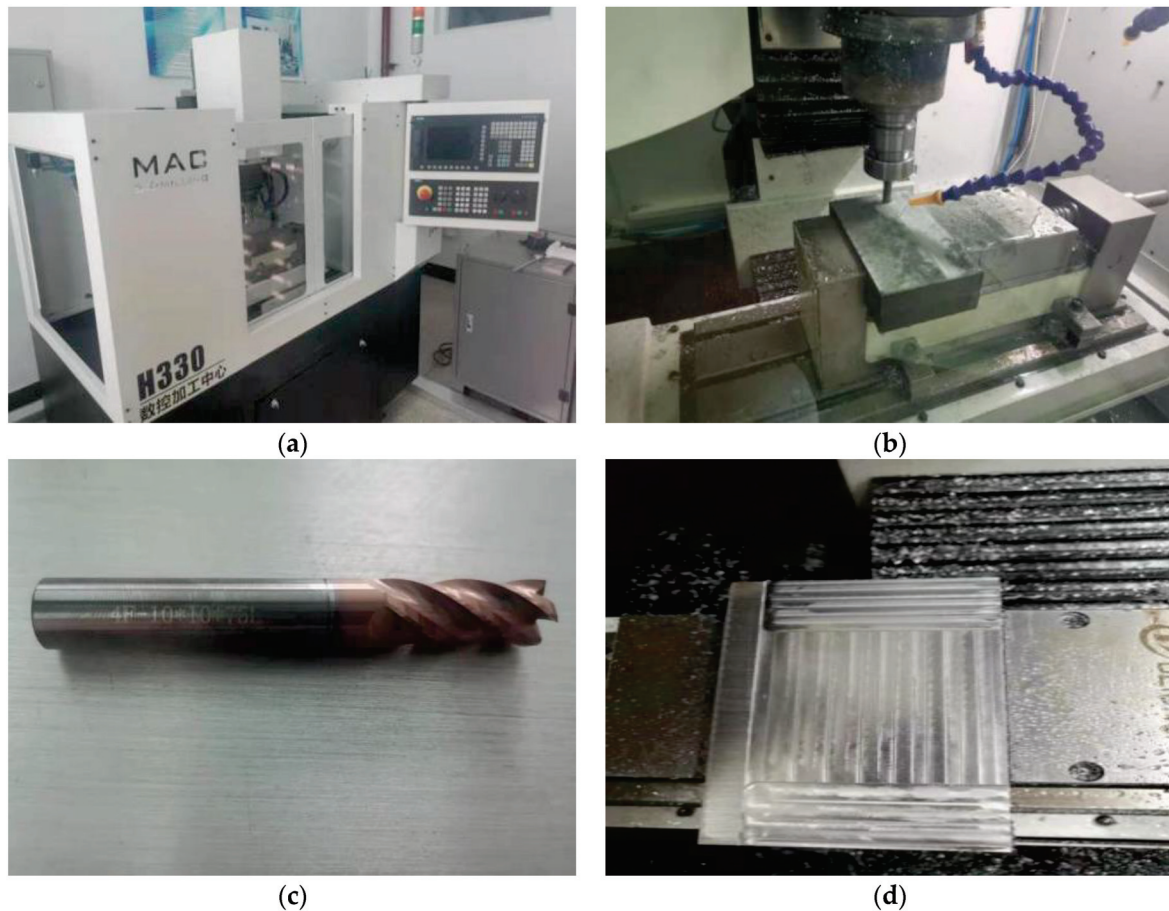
Experimental device. (a) CNC machining center. (b) The actual cutting test. (c) YG8 hard alloy spiral mill tool. (d) The finished part.
